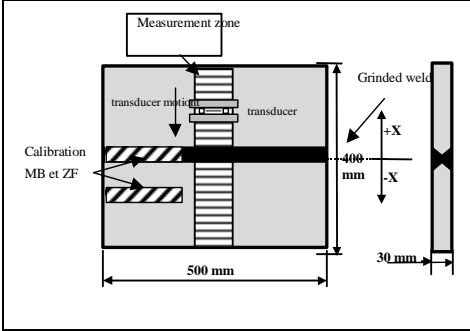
Welded sheets, positioning of the ultrasonic sensors and representation of the zones of test sample selection of calibration MB=base metal ZF = melted zone
